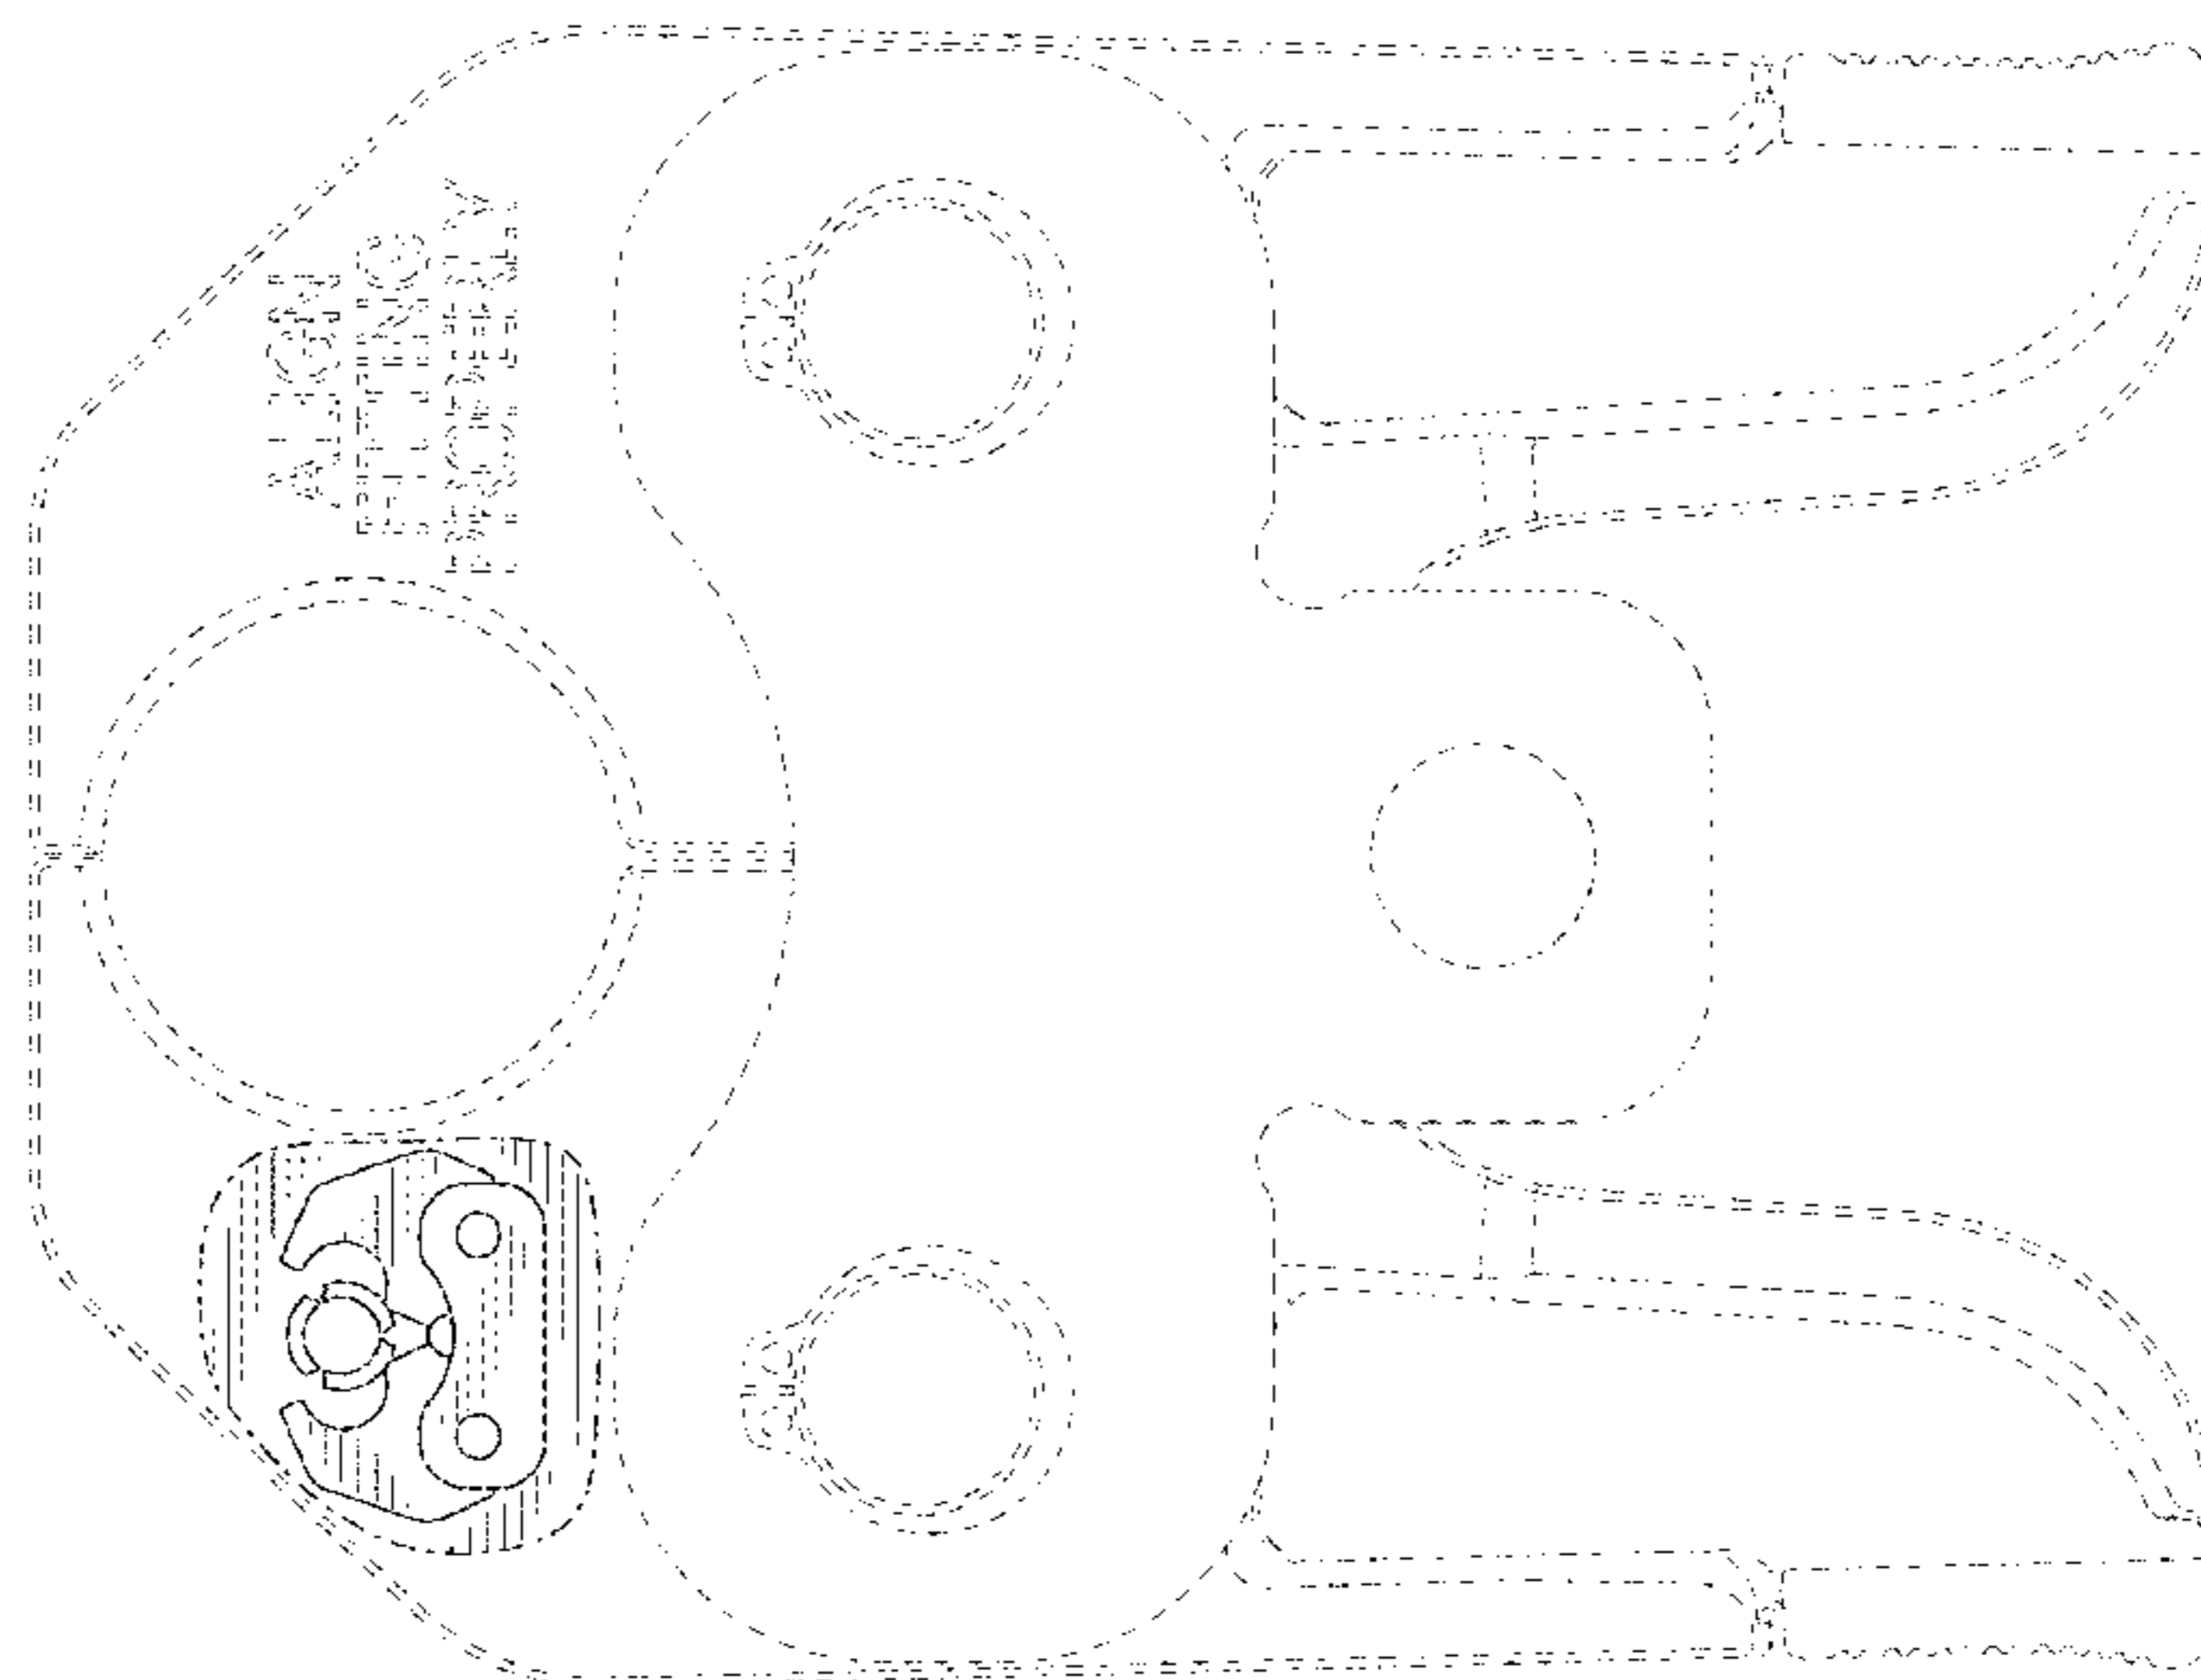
is a rear view of the jaw assembly of FIG. 1.
